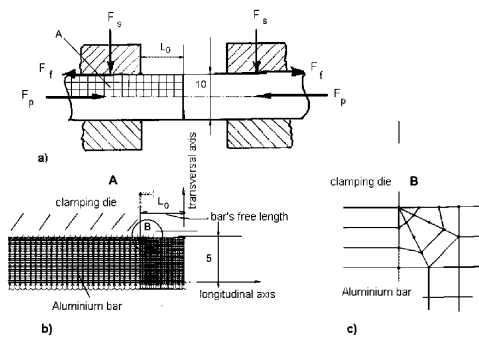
Butt-cold welding model: a) sketch of the butt cold welding; b) finite element model; c) adapted mesh for the critical area
